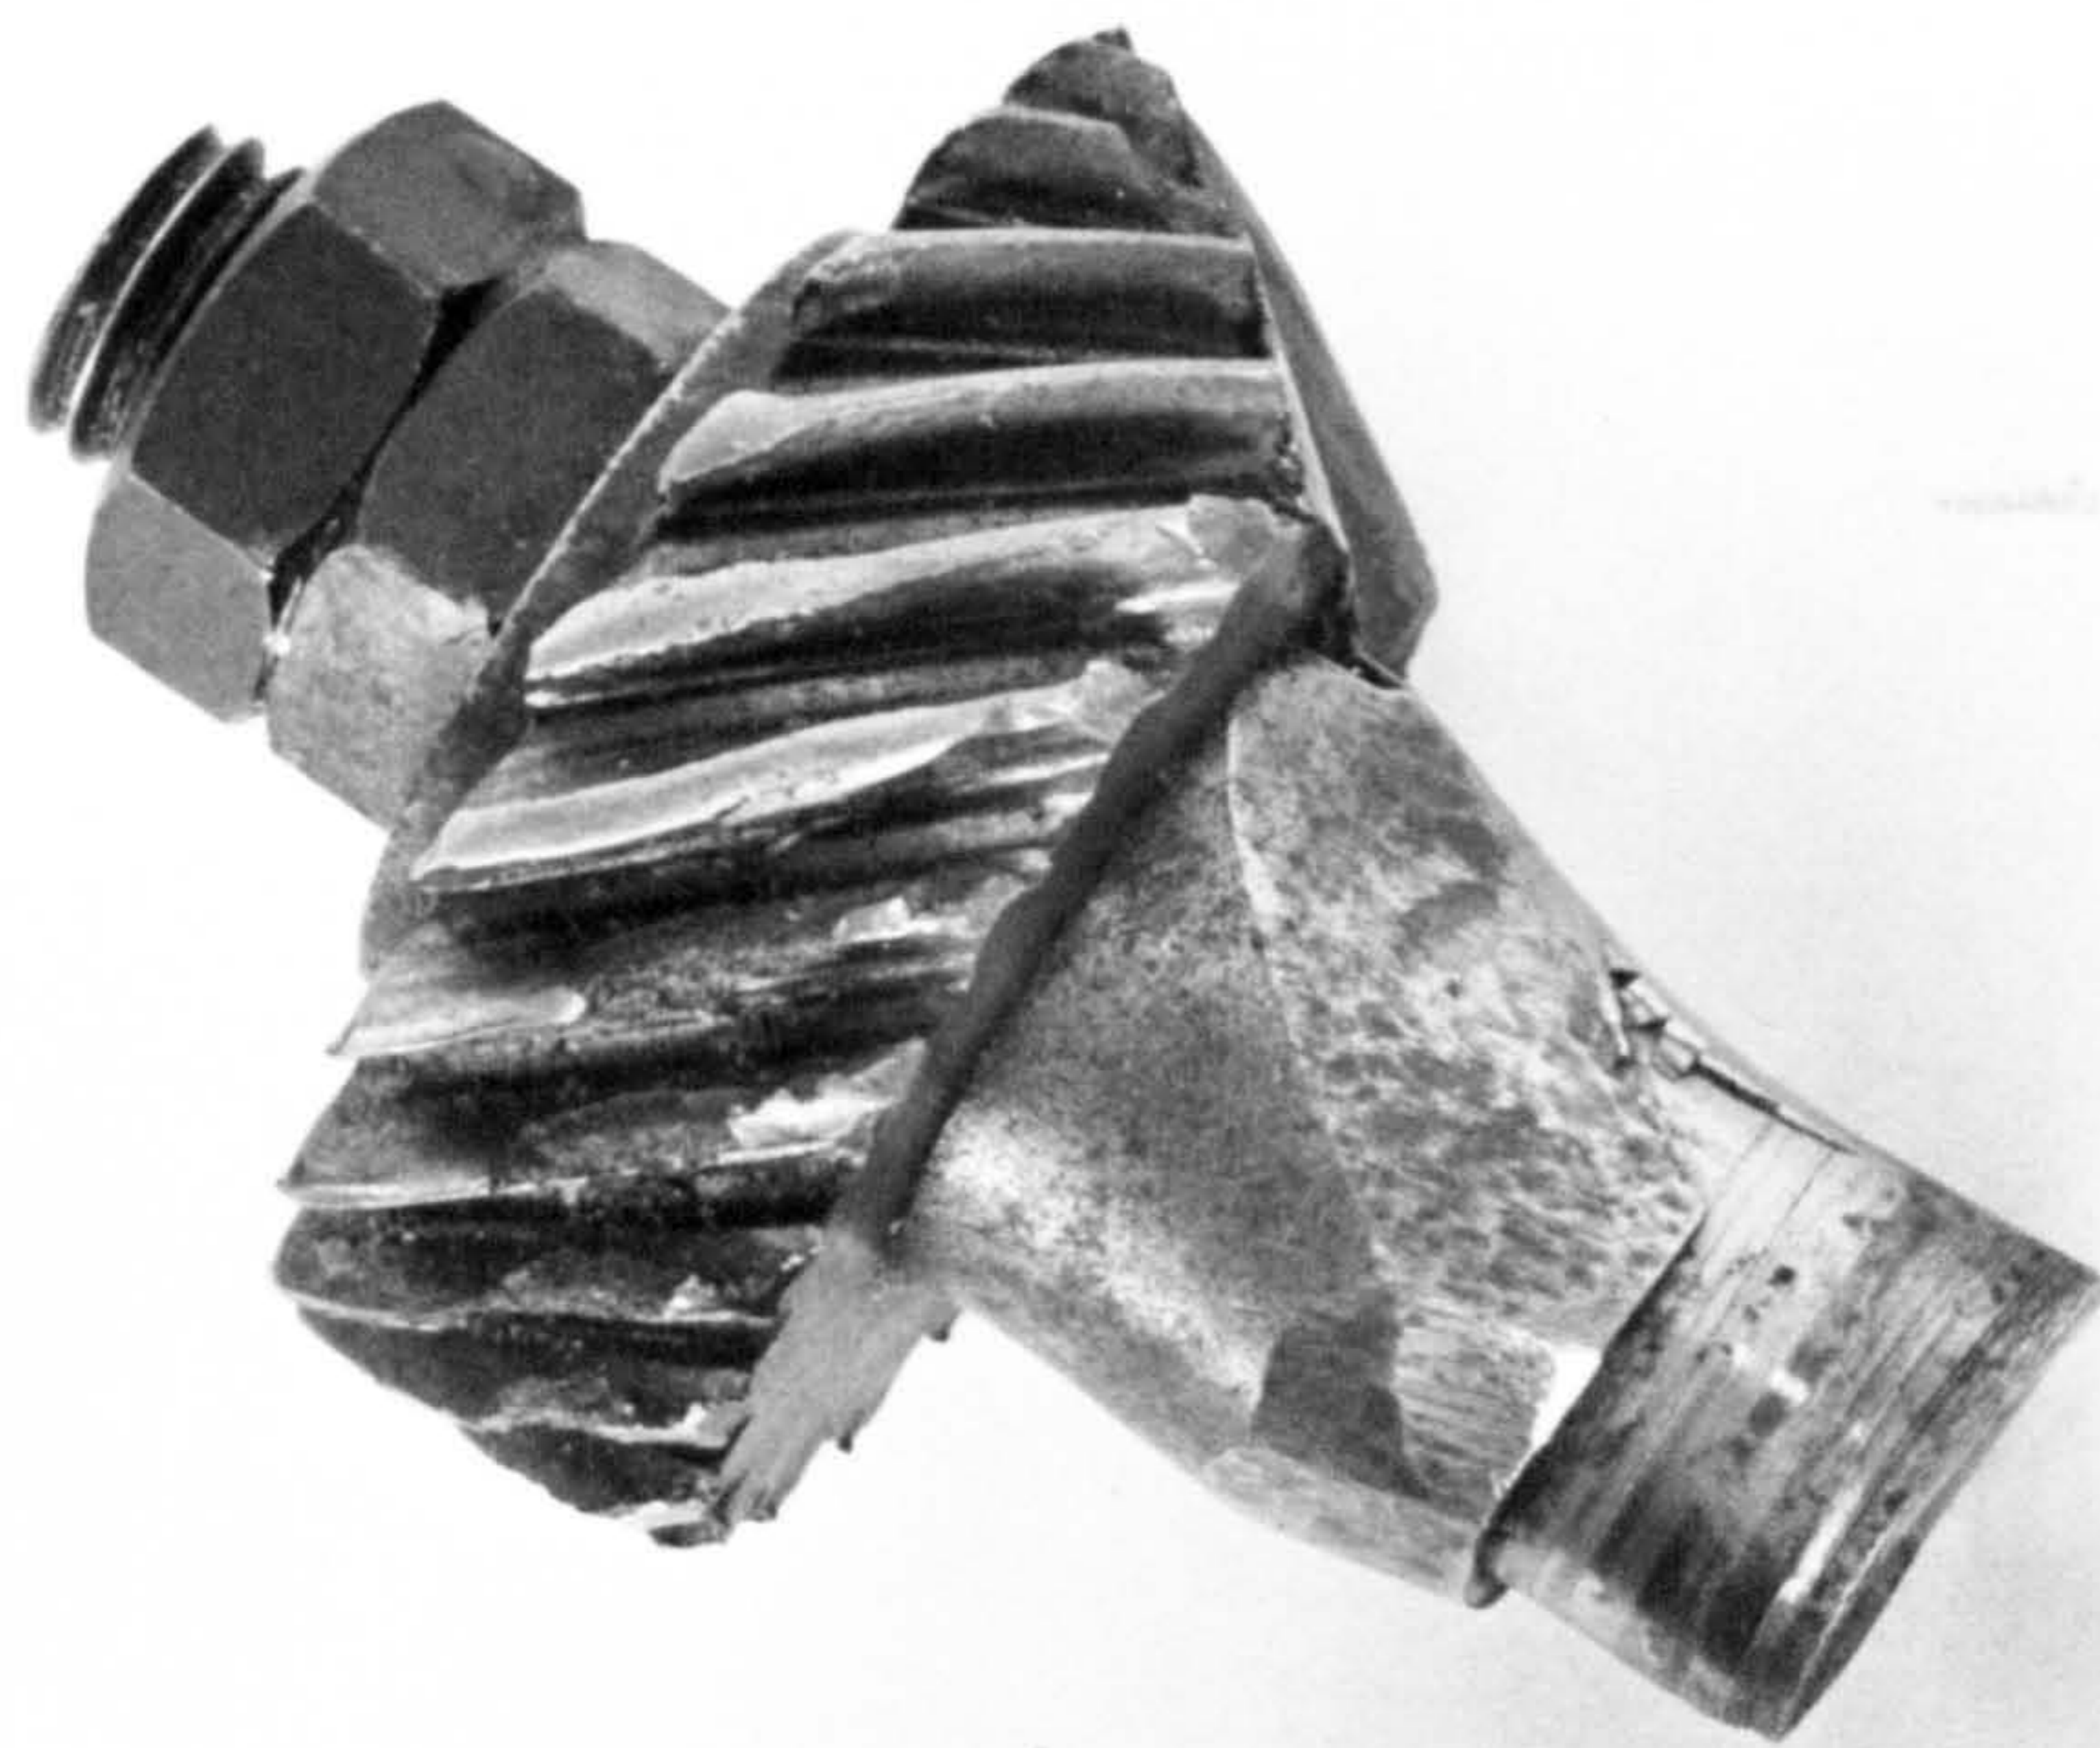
Worn Layshaft and Drawshaft Gears
